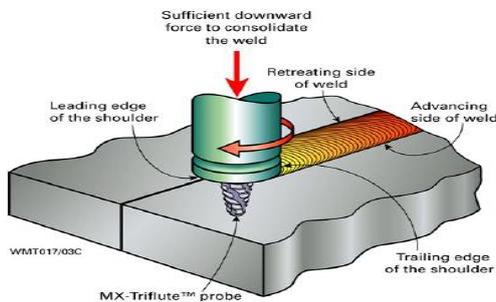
A Schematic Diagram Of Friction Stir Welding Process [7]
